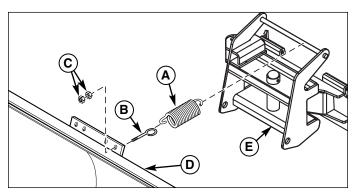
Spring Installation D. Dozer Blade A. Spring B. Eyebolt E. Frame Assembly C. Nuts, 5/16-18
